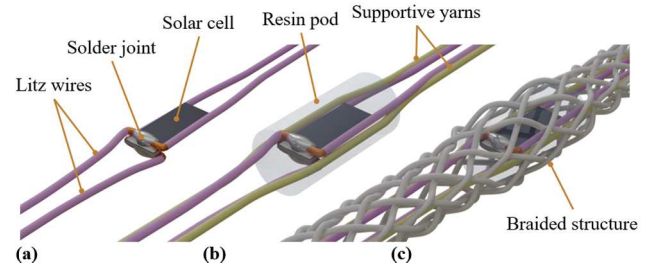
Stages of making solar E-yarn; a. soldered, b. encapsulated c. braided.
